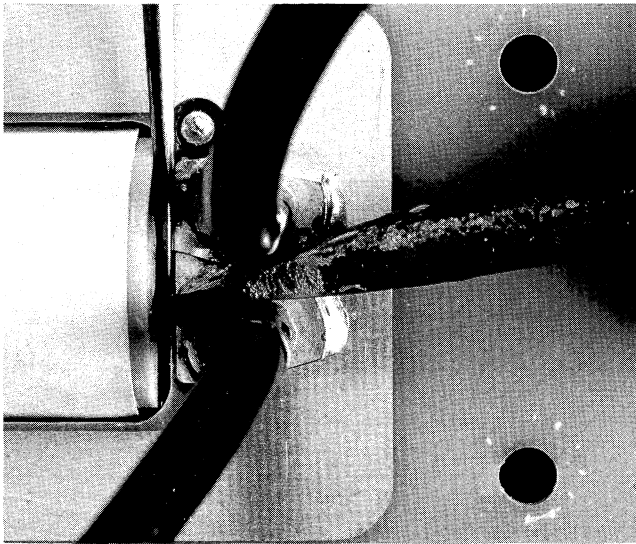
Soldering iron and scribe positions for lifting a shield strap.
